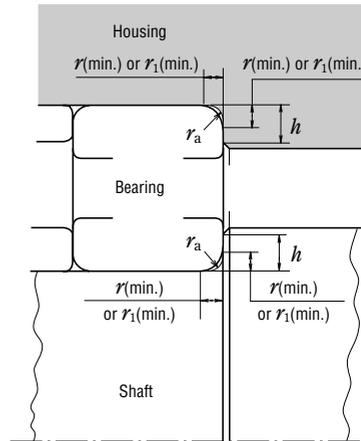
Chamfer Dimensions, Fillet Radius of Shaft and Housing, and Shoulder Height
